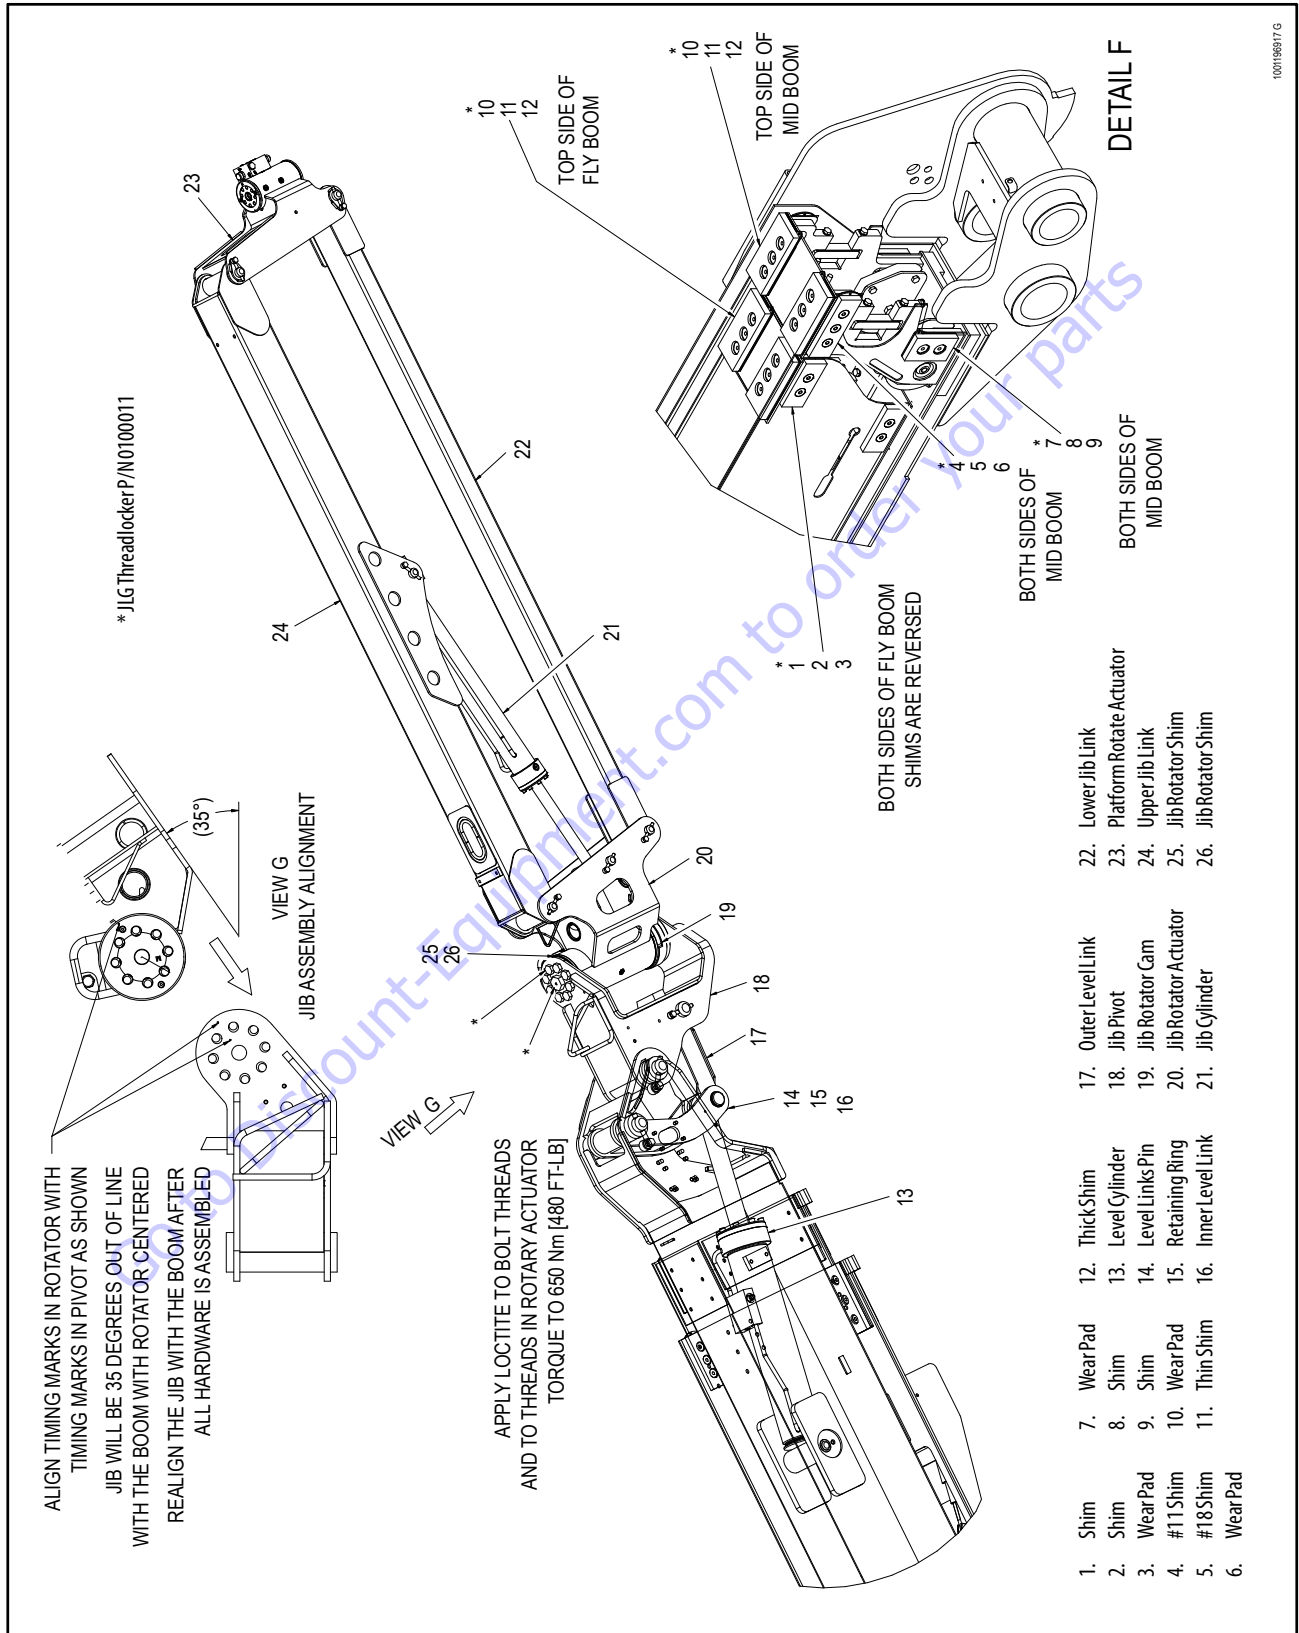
Main Boom Assembly - Sheet 5 of 7
